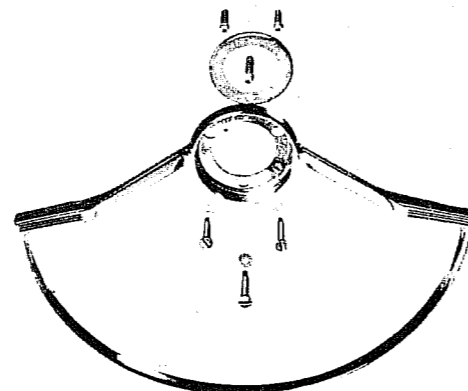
Horn ring mounting. Note springs and insulating washers.
